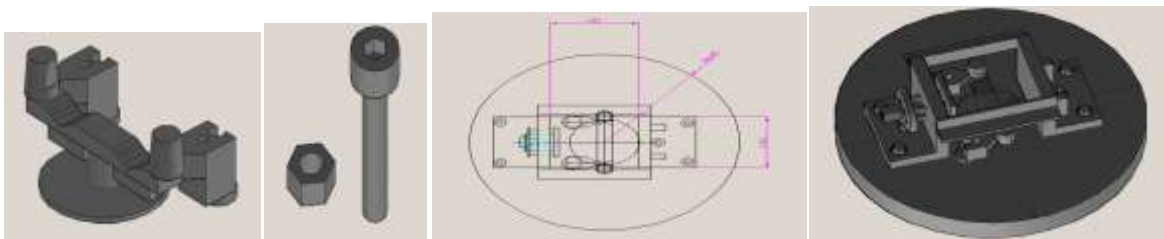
Spring loaded stopper Fig 3.4.6 Nuts and bolts Fig 3.4.7 Fixture - 2 assembly, (2-D and 3-D drawing).
